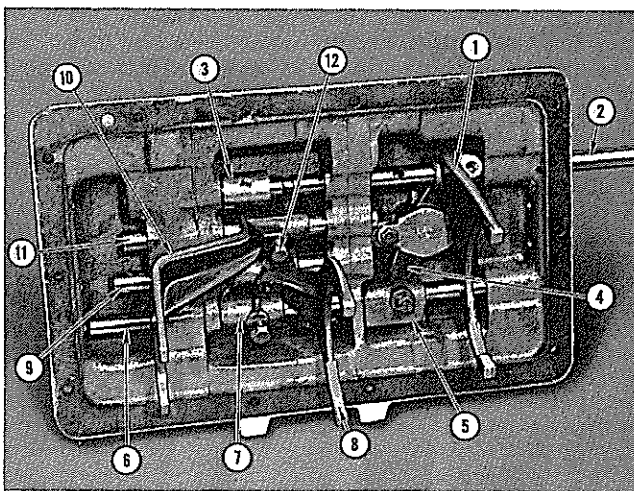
REMOVING SHIFTER YOKES AND BARS
